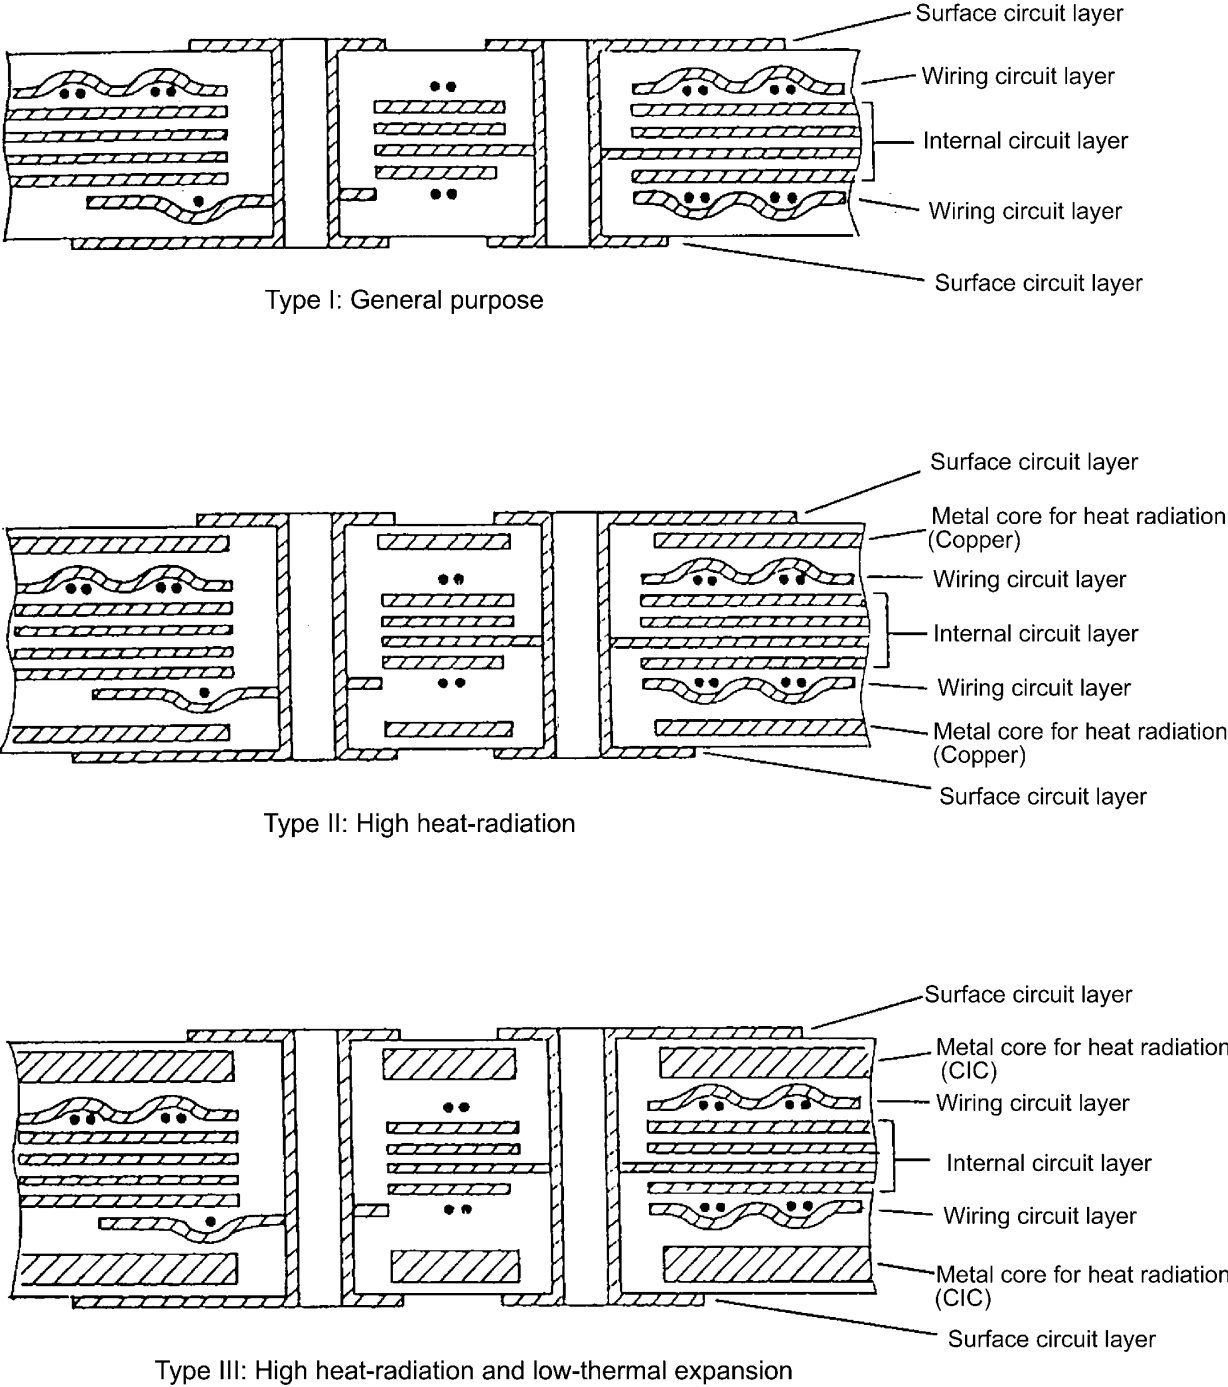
Basic Cross-Section of Printed Wiring Boards
